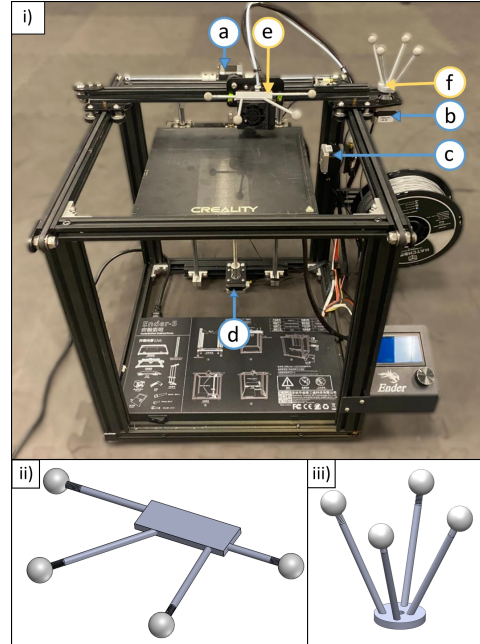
Ender-5 3D Printer [28]: i)-a y -axis stepper motor, i)-b x -axis stepper motor, i)-c extruder stepper motor, i)-d z -axis stepper motor, i)-e nozzle marker base, and i)-f x -axis timing pulley marker base. CAD design: ii) nozzle marker base, and iii) x -axis timing pulley marker base.
